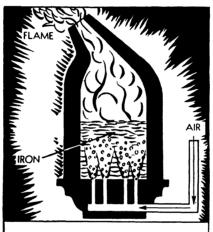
The Bessemer furnace (Courtesy of: General Motors Corporation)
